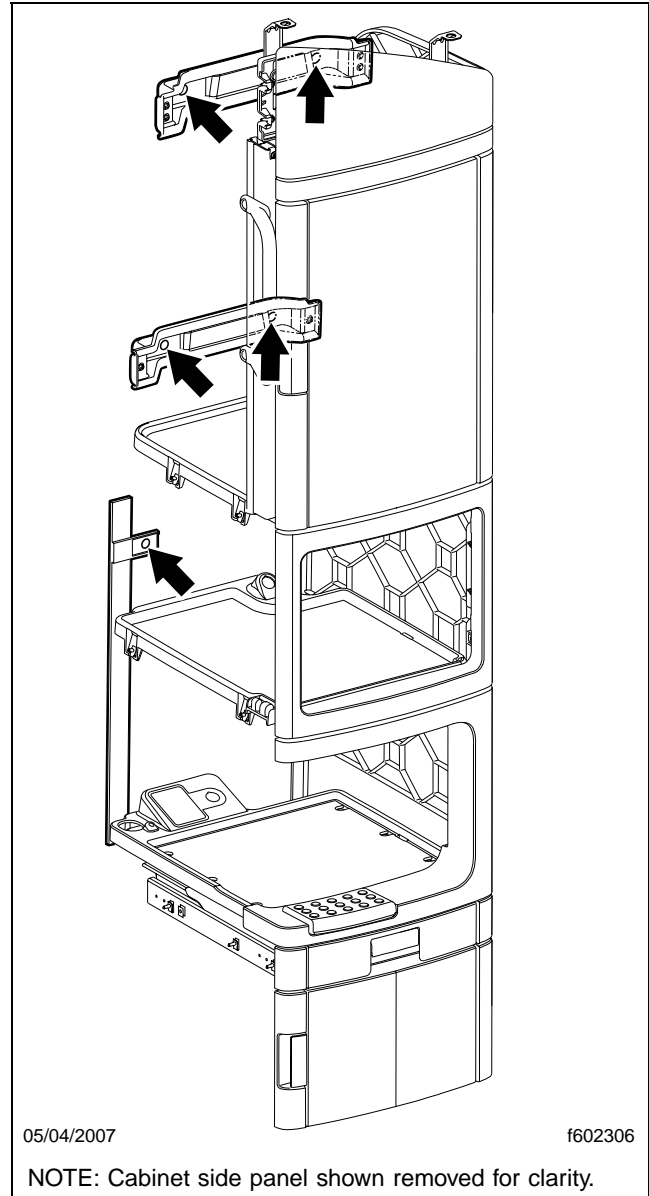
, Cabinet-to-Sleeper Wall Fasteners Inside Cabinet
